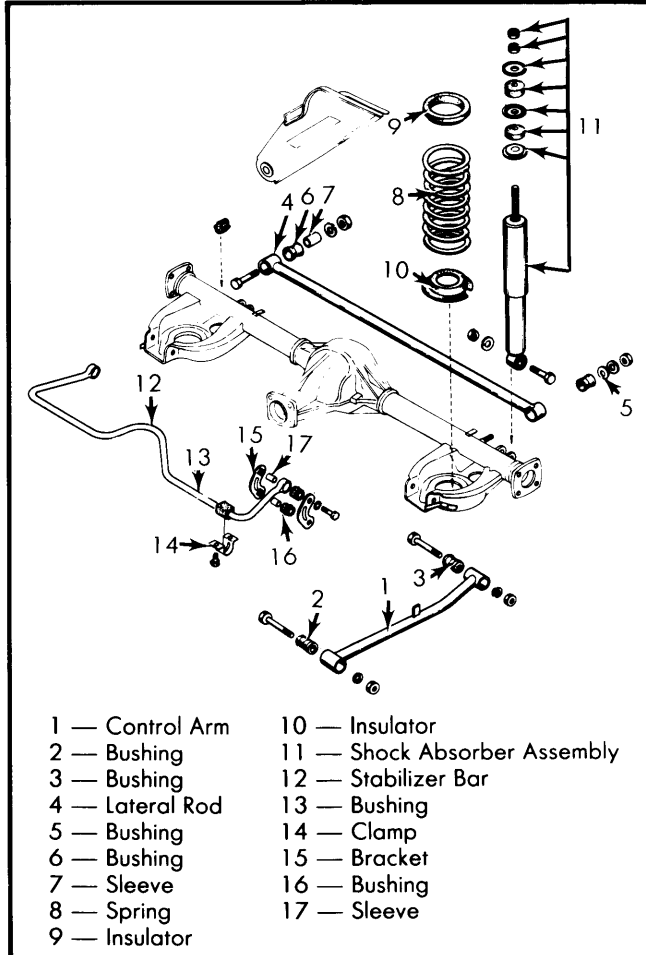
Exploded View of Isuzu I-Mark Rear Suspension
